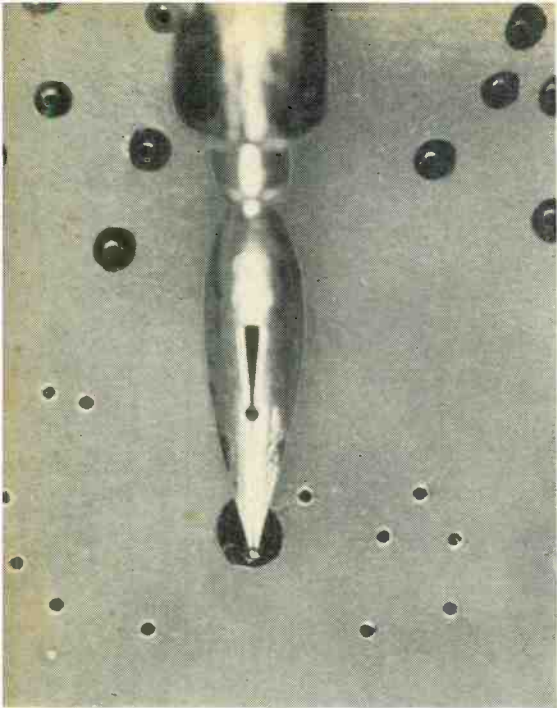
Use a pen or other applicator to put on liquid resist. After all drilled holes are circled, draw lines to connect them following your sketch.
